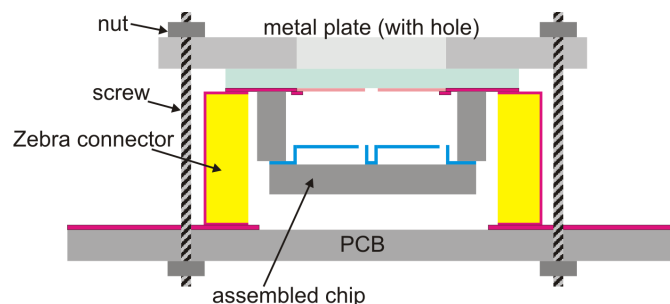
Assembled chip connected to a printed circuit board (PCB) using zebra connectors. A metal plate screwed to the PCB presses the chip onto the Zebra connectors. The metal plate has a hole, so the flaps can be observed from the top.
